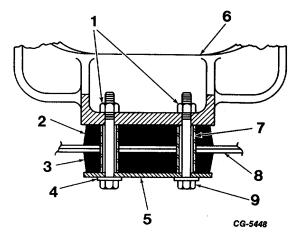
Engine Front Mounting with Two-Piece Insulator
